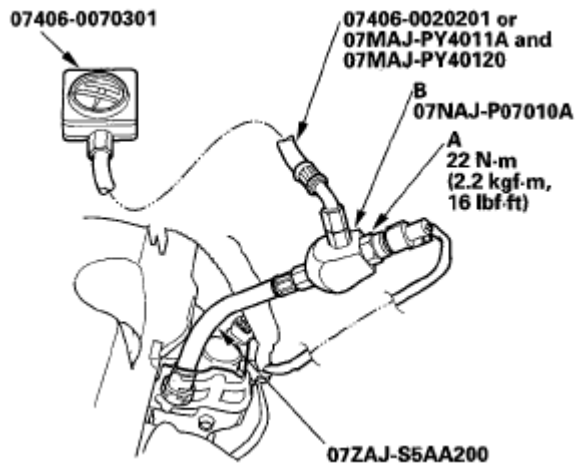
Identifying Rocker Arm Oil Pressure Switch And Special Tools With Torque Specification
